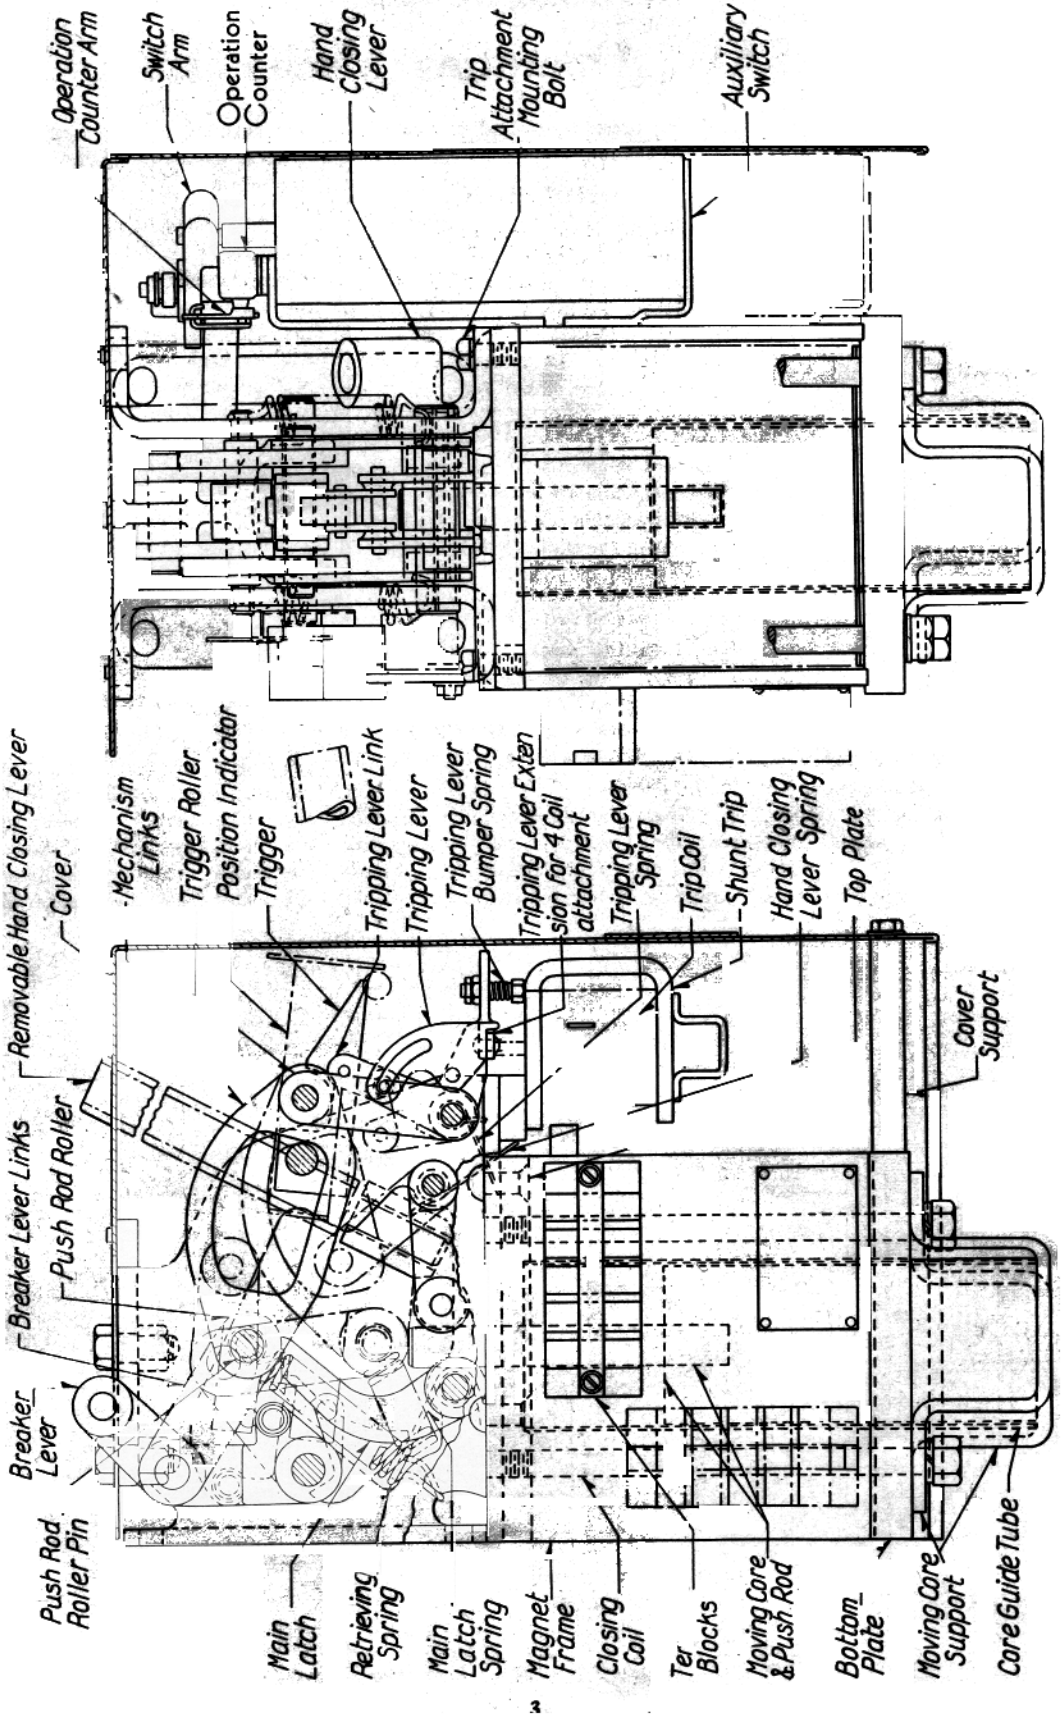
CIRCUIT BREAKER—OIL-TYPE "SAF-2" MECHANISM ASSEMBLY
